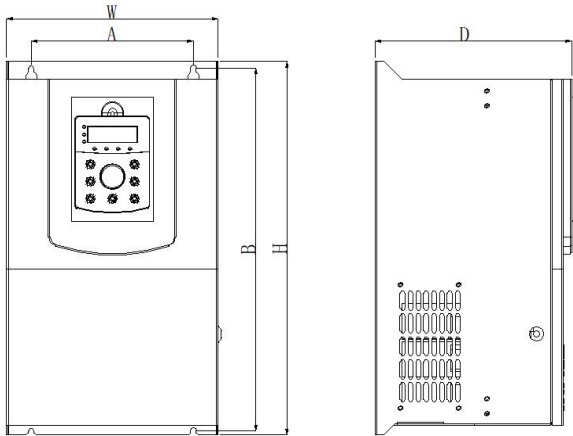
Outline and installation dimensions of 380V (4T) 18-37kW molded case chassis
